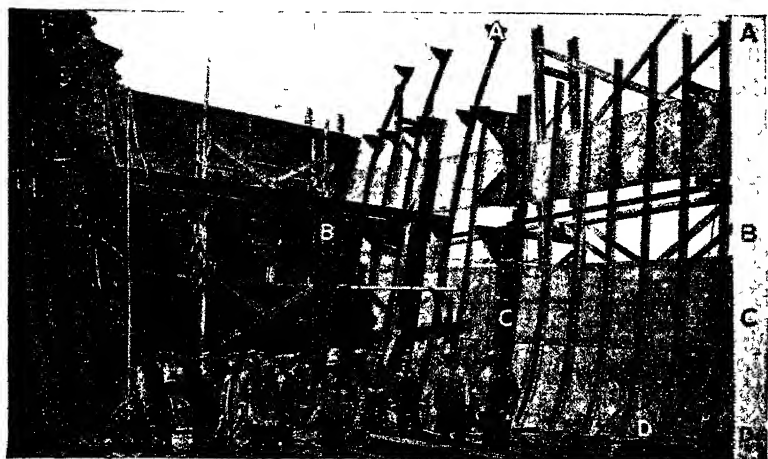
An Inside View of Frames and Collision Bulkhead.
